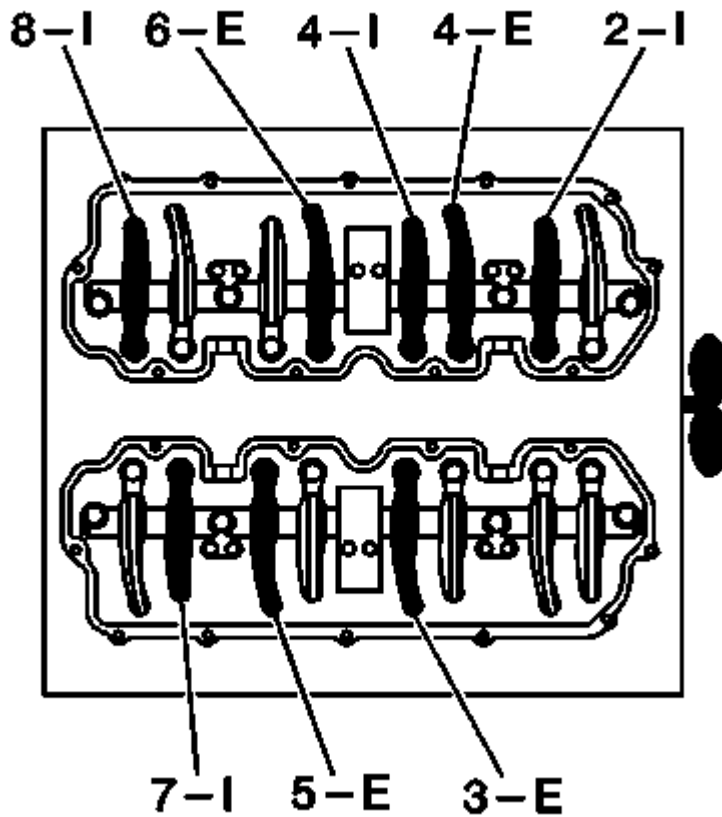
View Of Rocker Arm Intake & Exhaust Valves 2, 3, 4, 5, 6, 7 & 8
